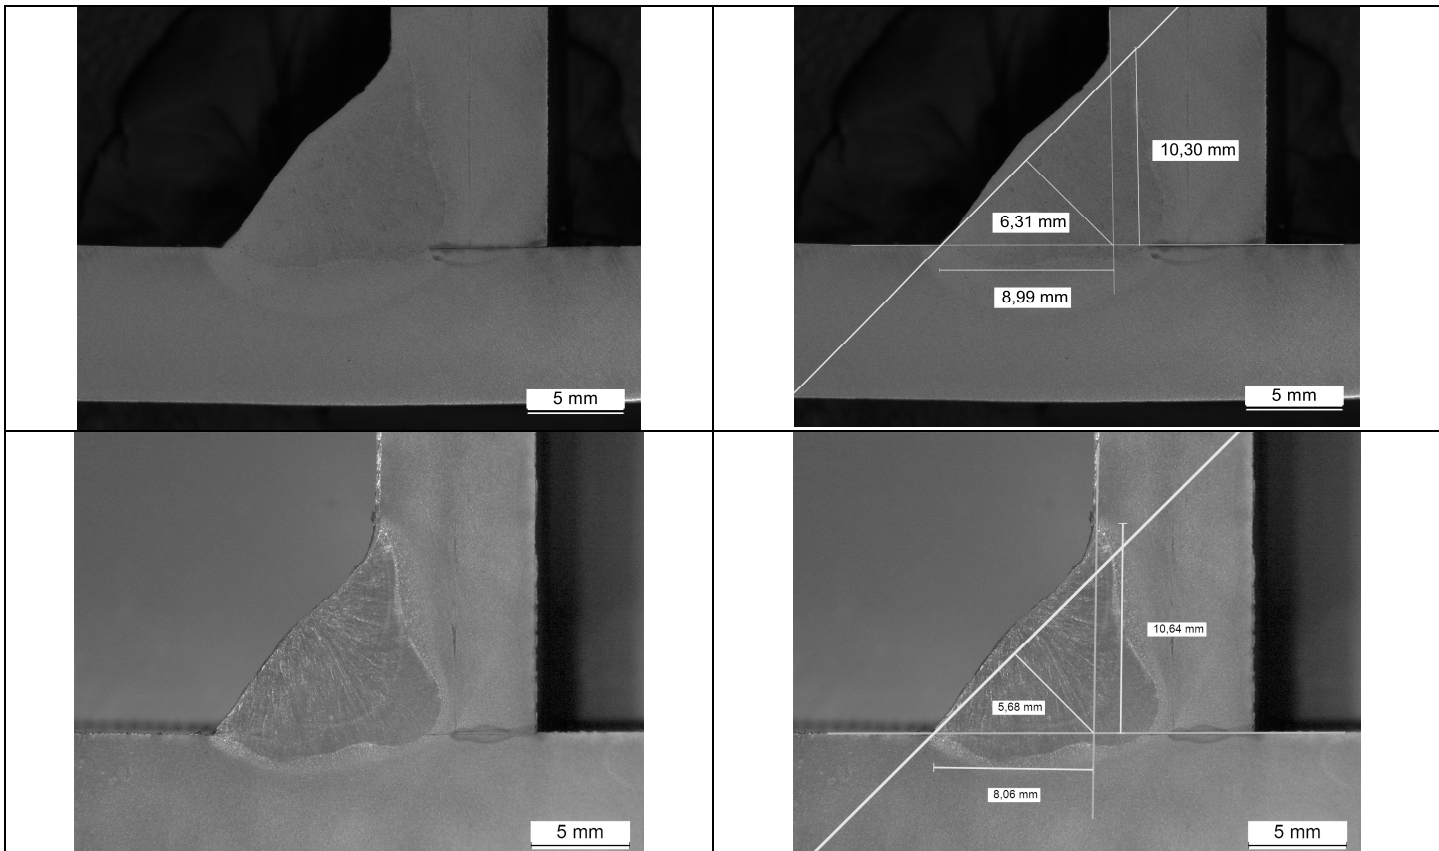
Macrographic examination of the 8mm fillet weld sample
